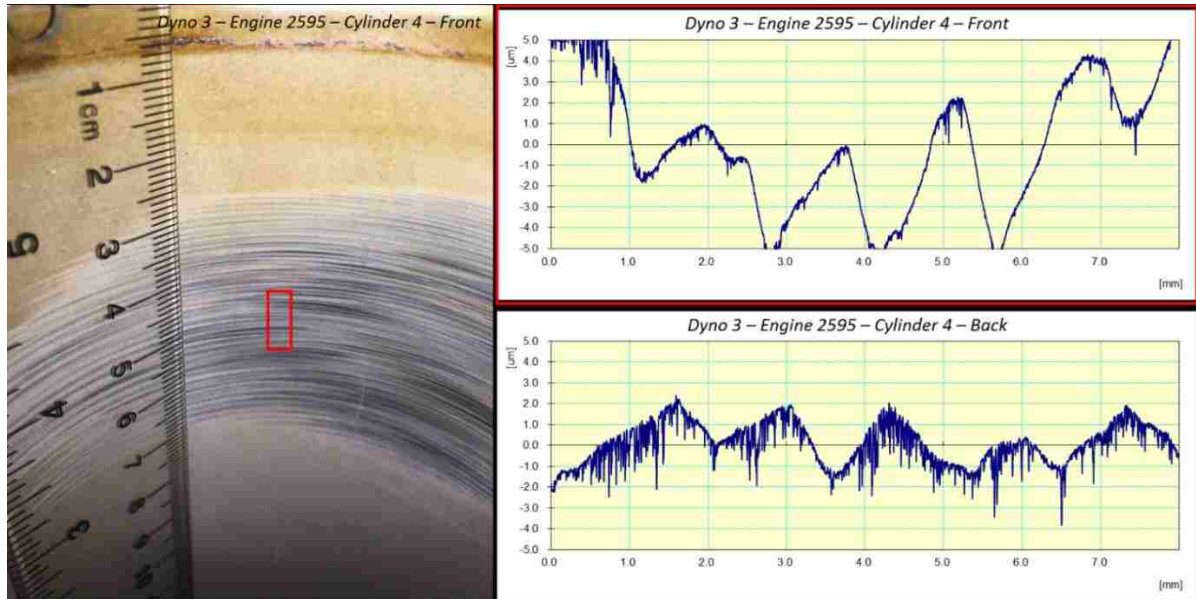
Dynamometer 3 - Engine 2595 - Profilometry - Ring Flutter - Cylinder 4
